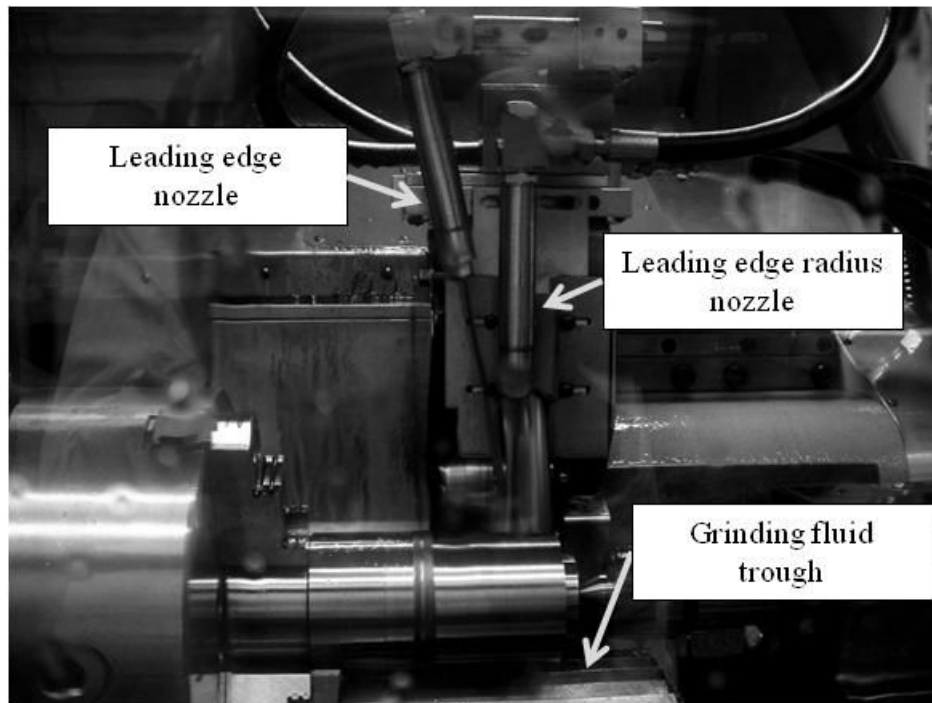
Detailed view of Edgetek SAT set-up for later cylindrical traverse grinding trials
